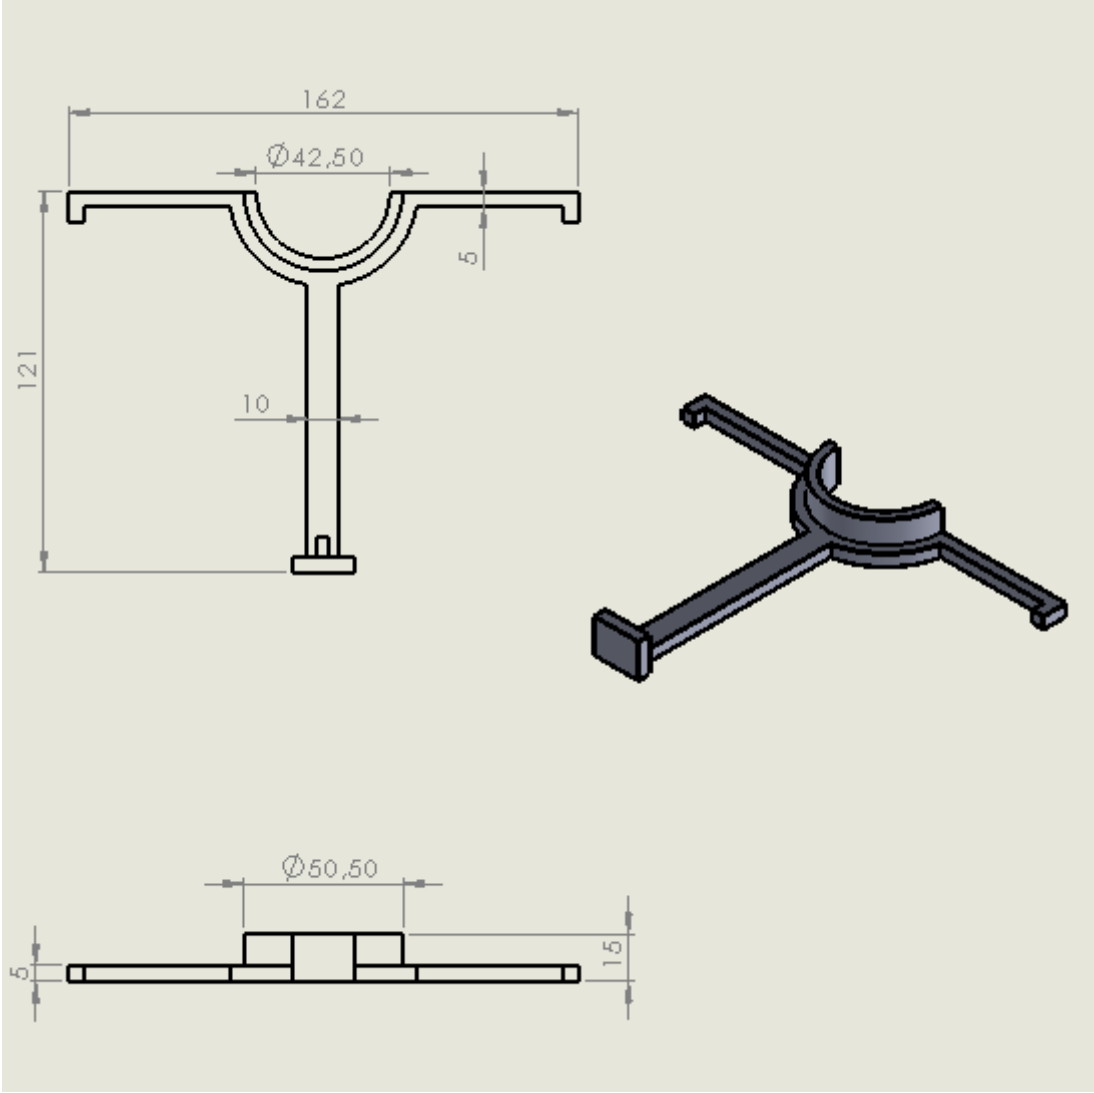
Drawing of "Centring brackets for stomach" with dimensions.
